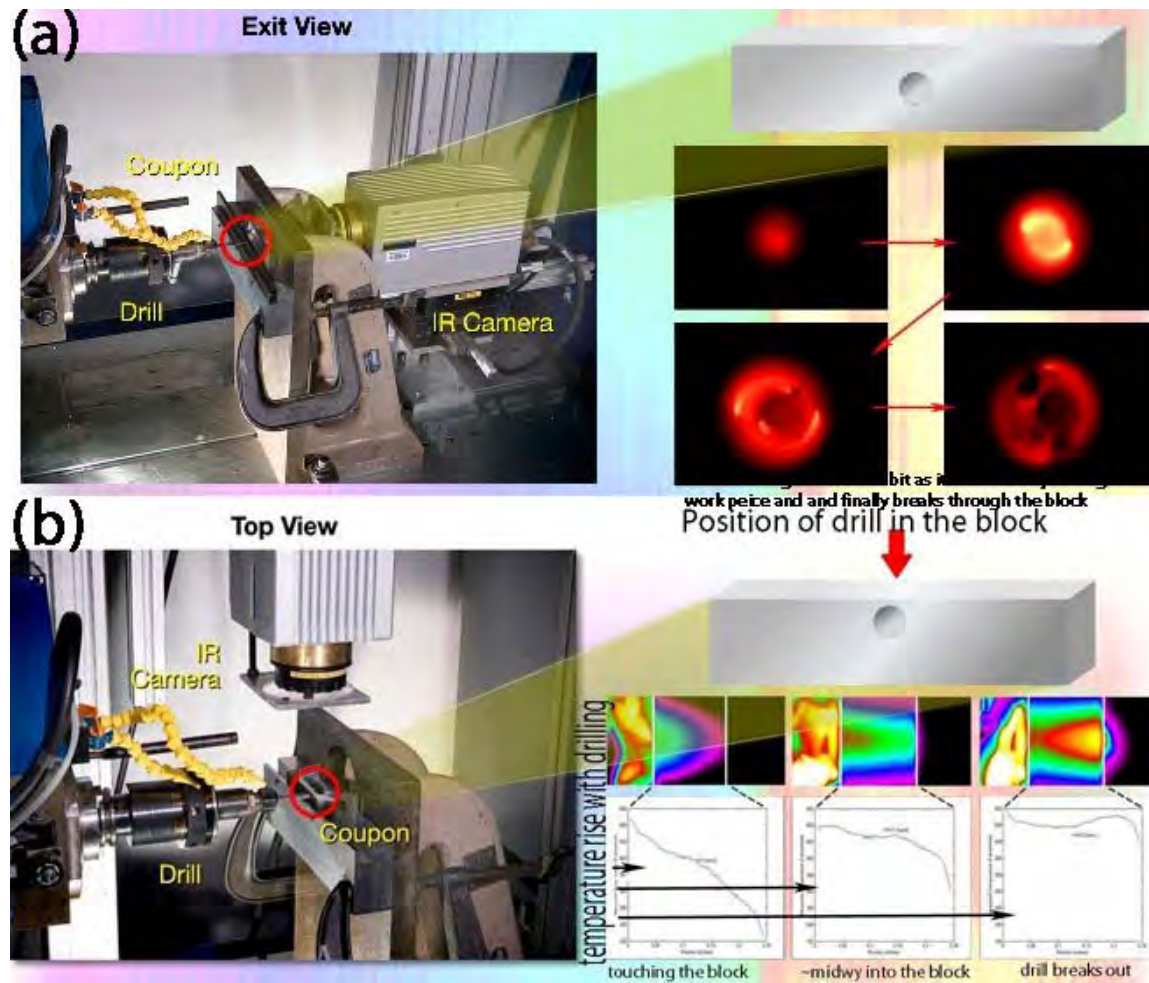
Boeing validation testing test fixture (Courtesy James Castle, Boeing Co.).
